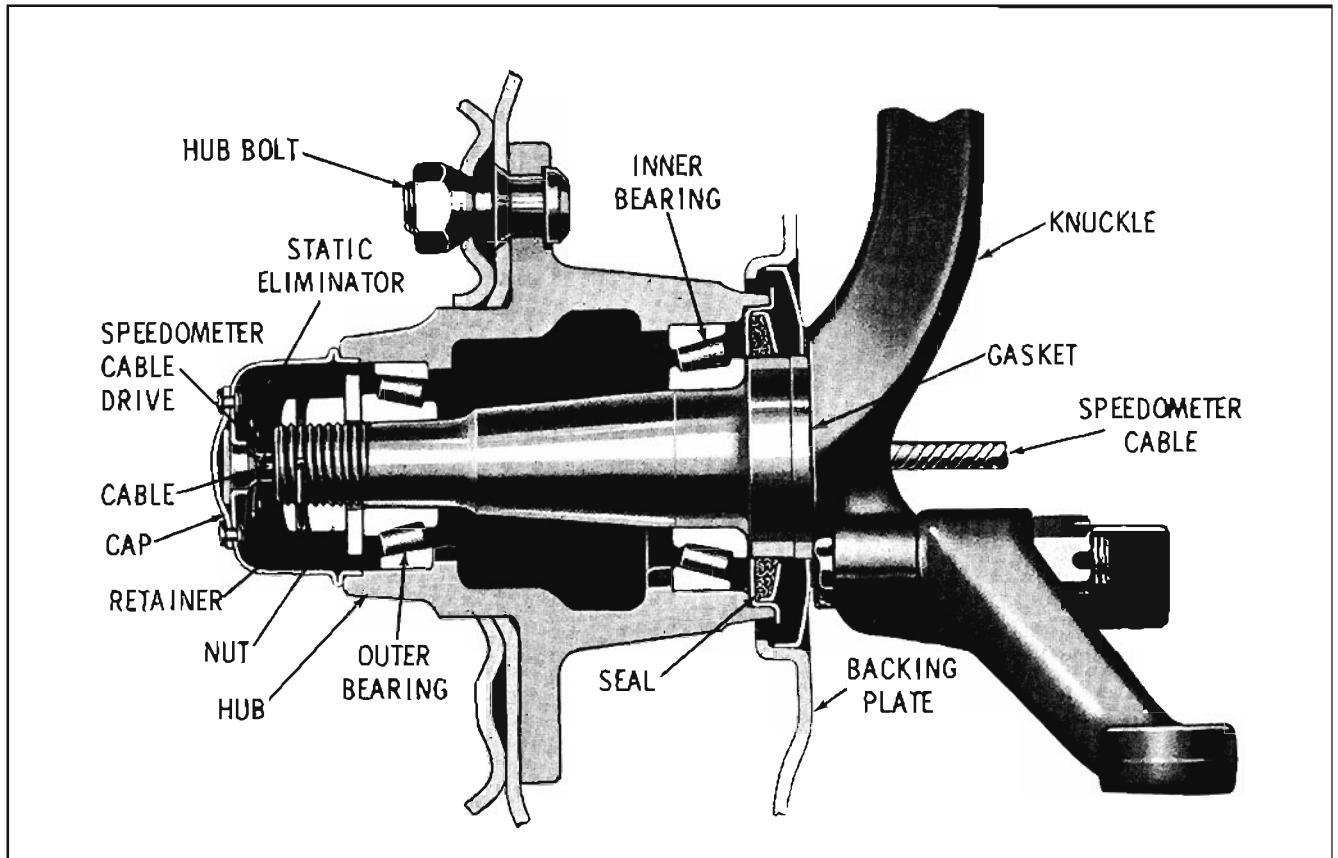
Knuckle and Hub Assembly (Left Shown)
